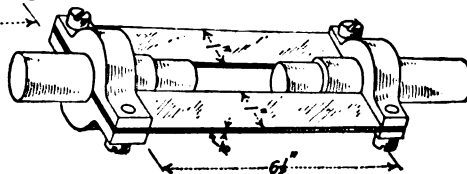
DETAILS OF THE DOUBLE FLAT-BLADE SPRING
